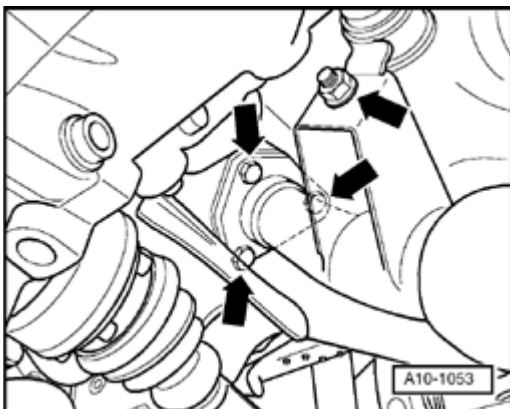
Removing Bolts Securing Catalytic Converter To Front Exhaust Pipe
